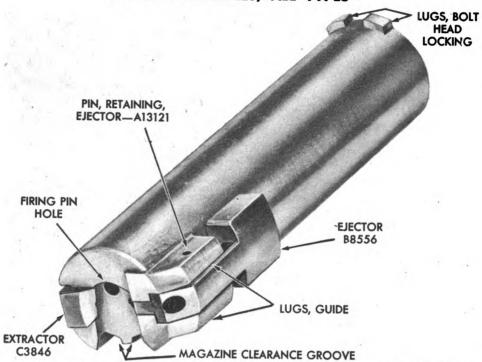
Bolt Head Assembly of U.S. Rifle, Cal. .22, M1
